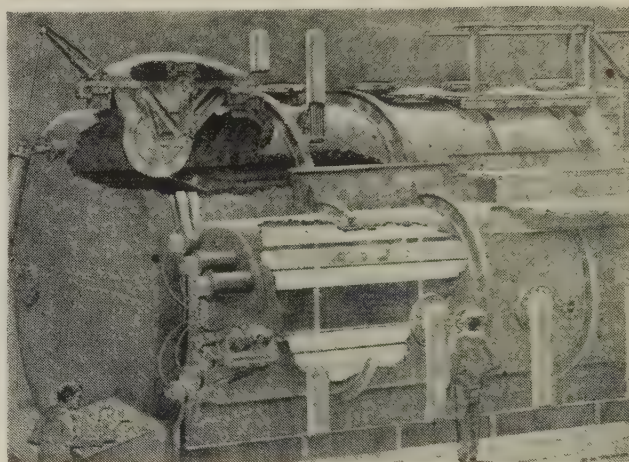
CUTAWAY VIEW OF LAUNCHING END OF TANK
